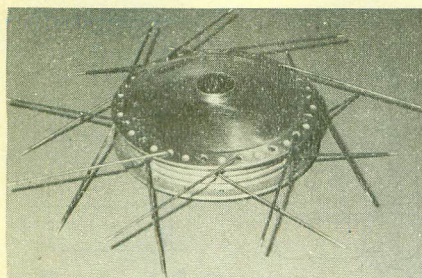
Place inner and outer spokes in one side of rim and then invert wheel and install remaining spokes.
